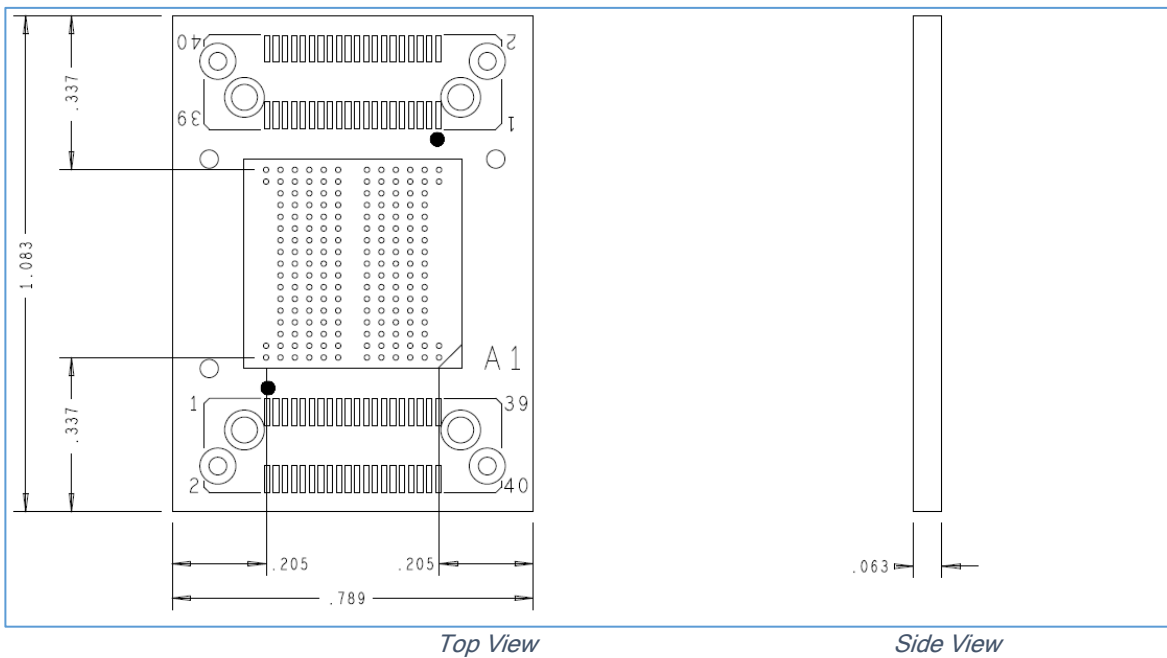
LPDDR3 178 Ball Direct Attach Compliance Interposer Mechanical Dimensions
